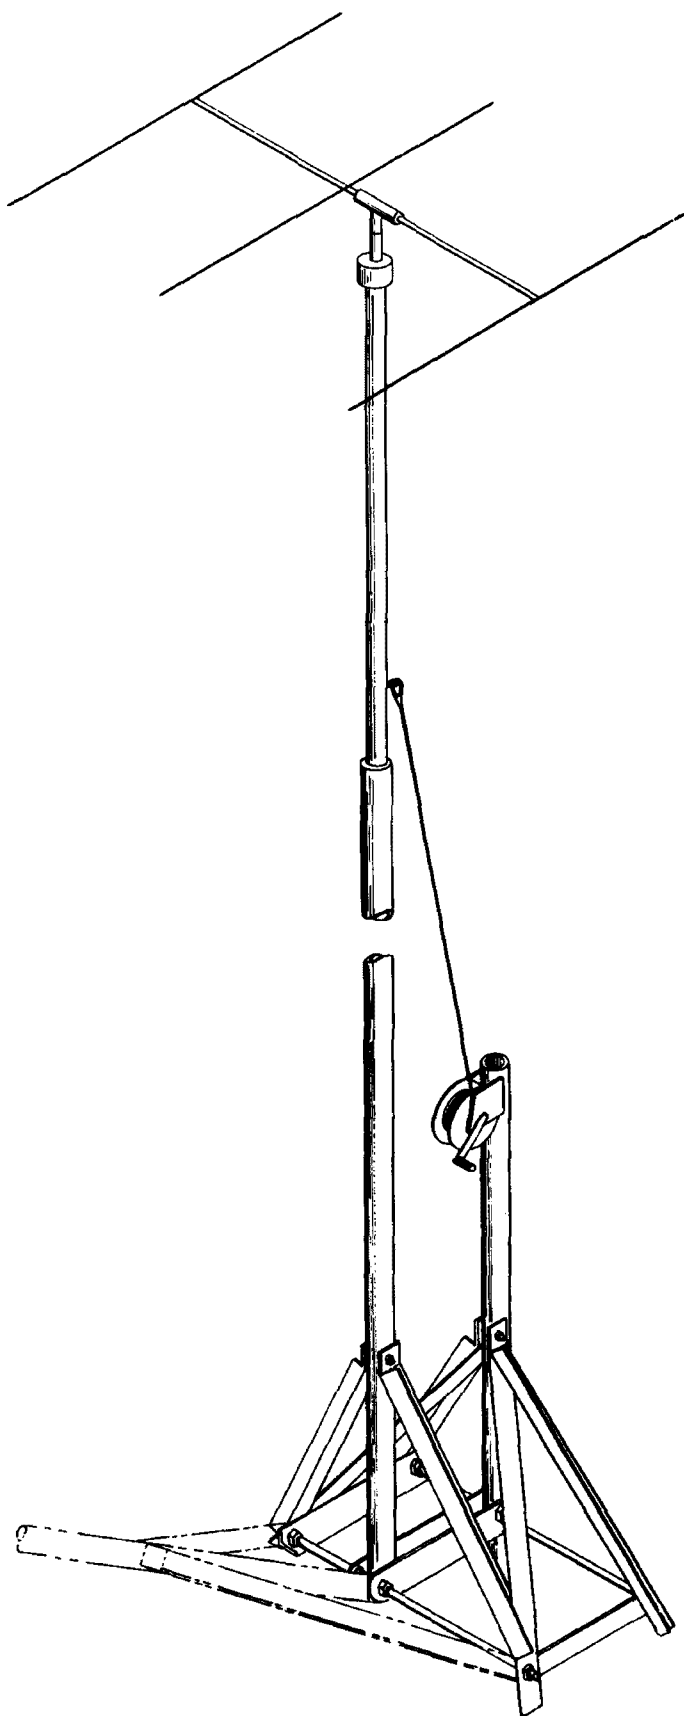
Complete tilt-over mast structure showing mast-hinge assembly.
